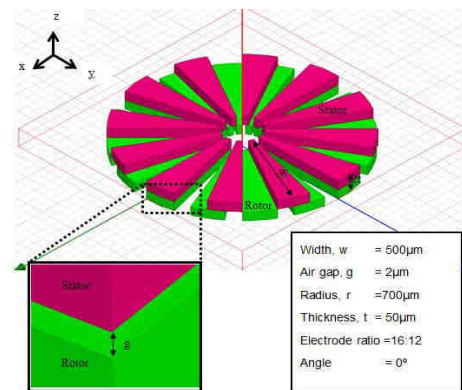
3D view of Design 1 (Bottom-Driven (Linear)) with initial dimension
